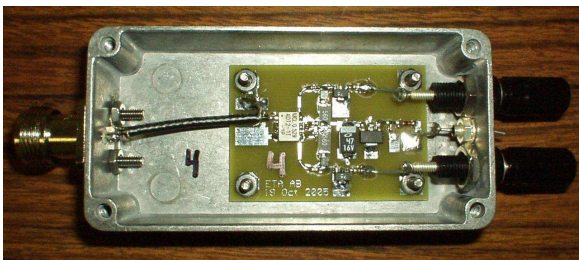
Cover removed from a preamplifier to show circuit board and connections to dipole (right) and coaxial cable (left).
